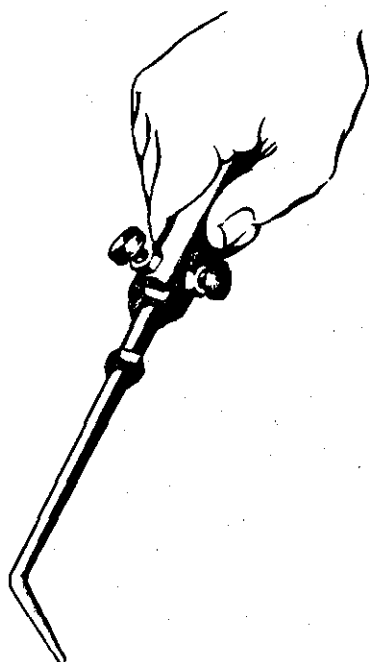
Holding the acetylene torch to weld heavy materials.
